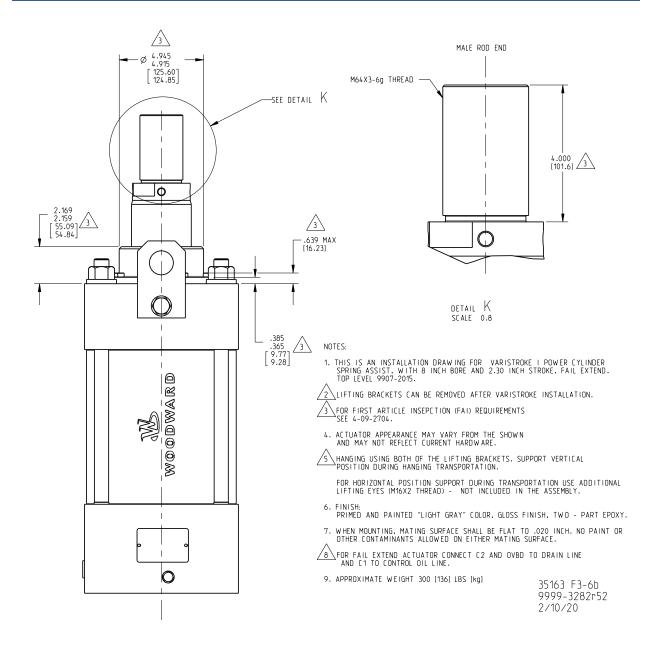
VSPC 8x2.30 Installation Dimensions
